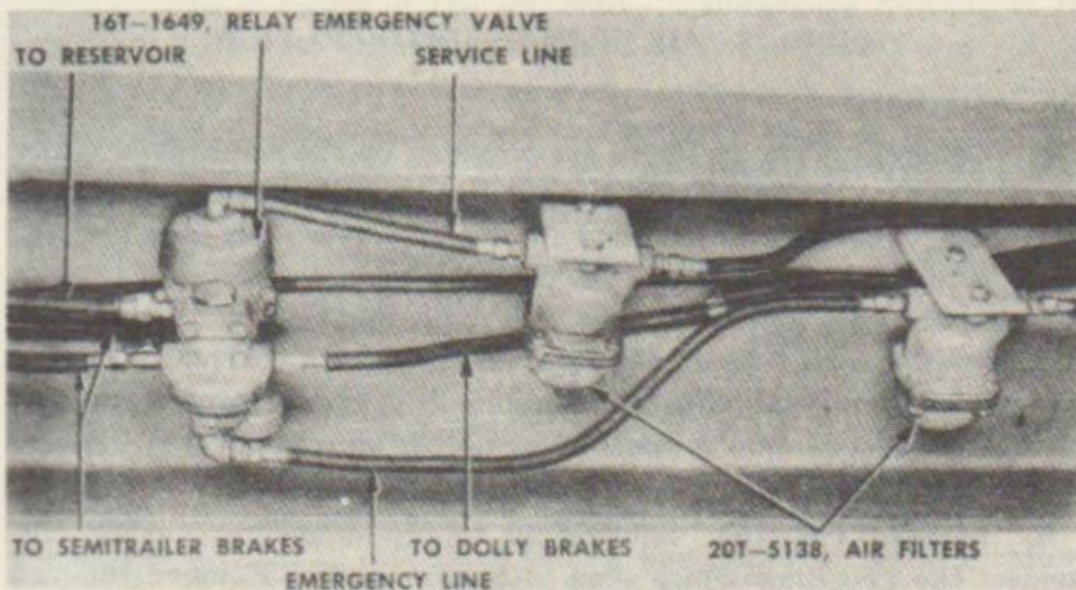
RELAY-EMERGENCY VALVE AND AIR FILTERS
